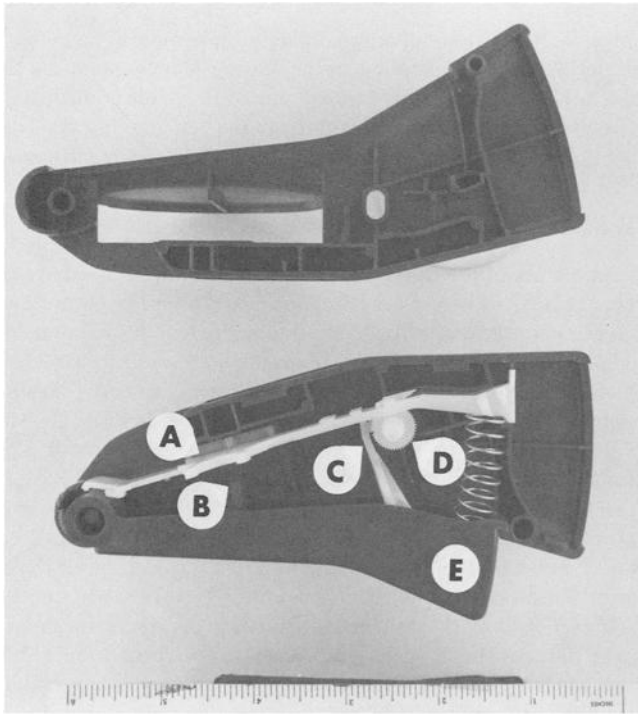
Components of Dymo Model 1885 Handimark label maker: (a) character wheel attachment site, (b) embossing press, (c) drive wheel advancer, (d) drive wheel, and (e) embossing trigger.
